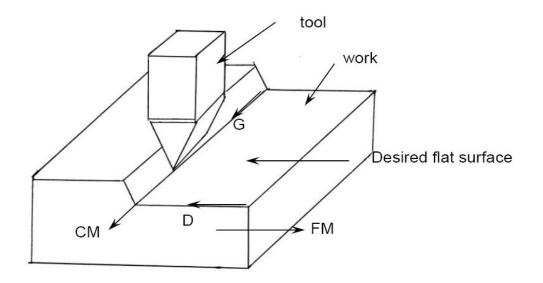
Principle of producing flat surface in shaping machine
